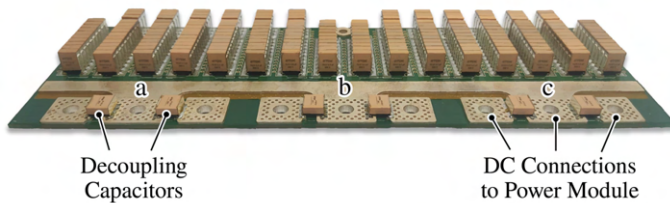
Bottom view of the DC-link board directly connected to the power modules.
